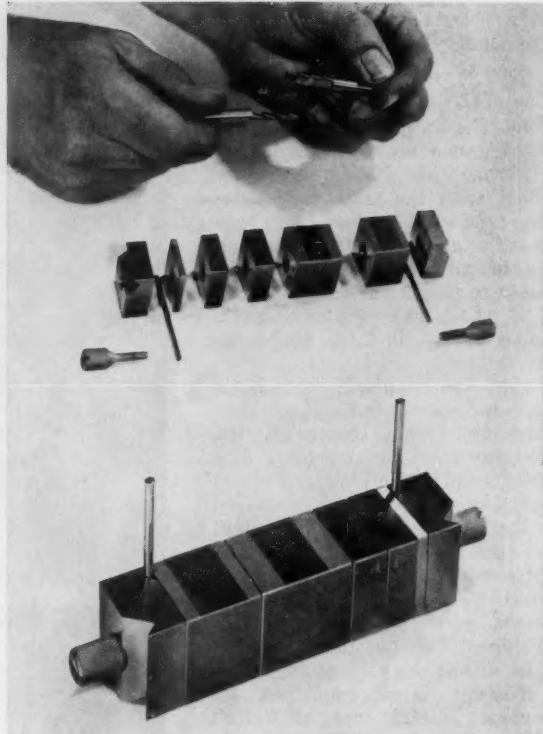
(Upper View) Assembling an inside caliper gage, using DoAll square gage-blocks and accessories shown in Fig. 1. (Lower View) Enlarged view of the assembled inside caliper gage
